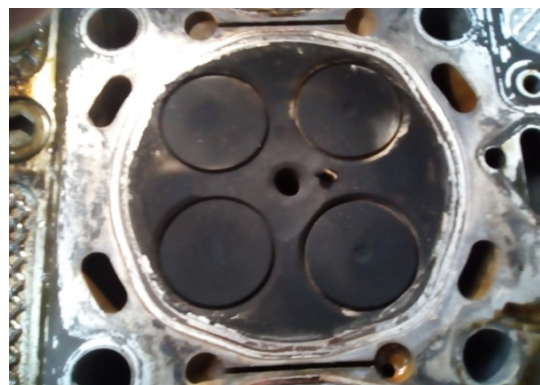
Motor engine IVECO F1CE0481HC003 - view 3 of the lower part of the cylinder head above the third cylinder.
